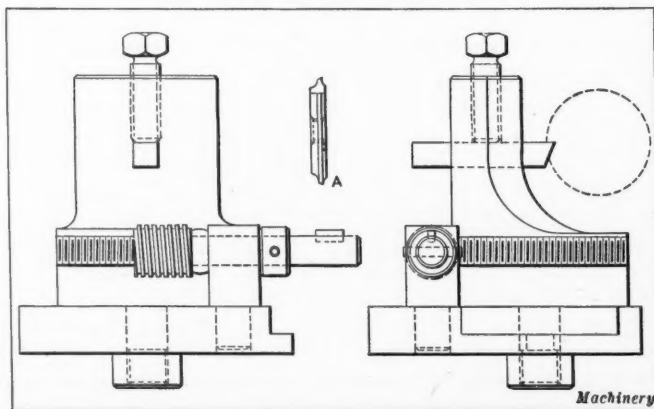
Offset Tool-holders made by Ready Tool Co.
